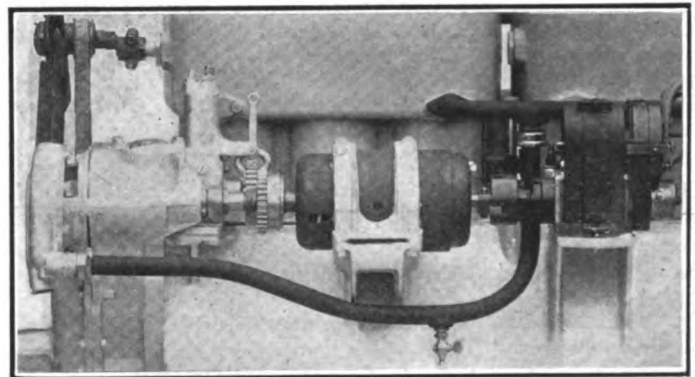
Installation of Bosch lighting generator between the pump and magneto at the side of the Marmon engine
